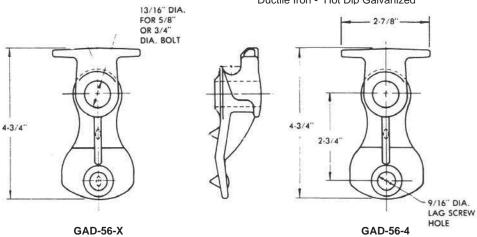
1/2" lag screw or 3/4" through bolt may be used in bottom hole if desired
